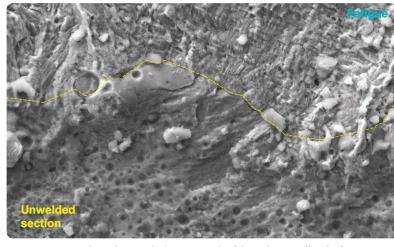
Secondary electron (SE) micrograph of the right propeller shaft fracture surface, showing fatigue striations that developed at the unwelded areas of the forward weld, after cleaning.
